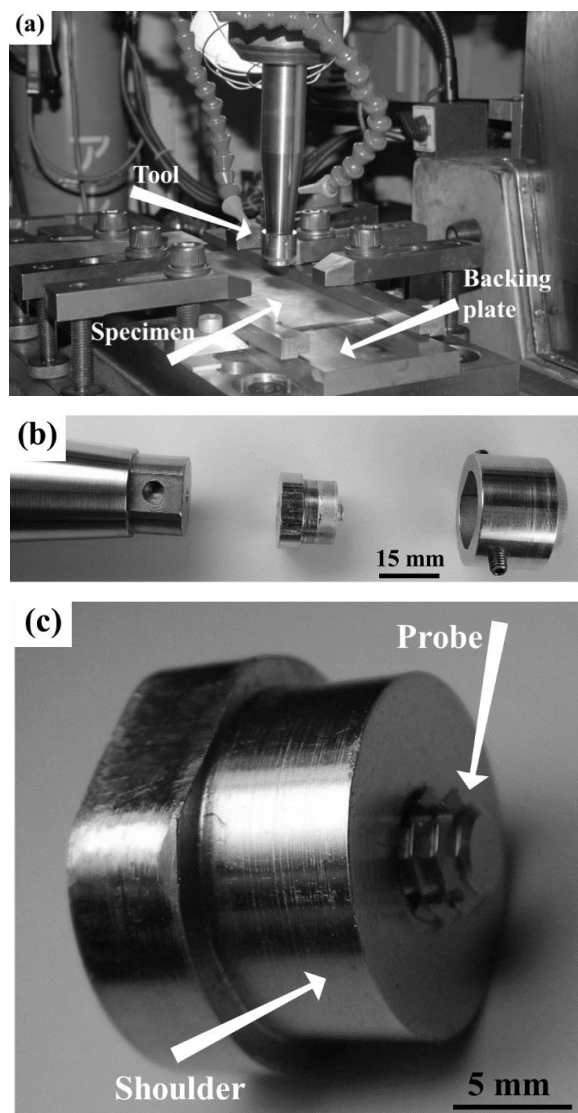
(a) Experimental setup. (b) FSP tool parts. (c) Chip of the tool
